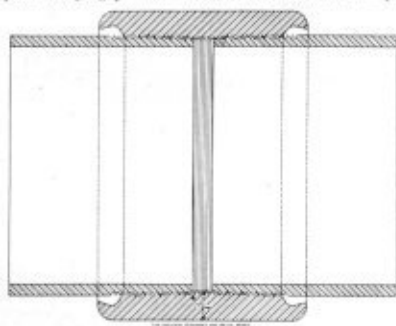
HEAVY WROUGHT IRON JOINT COUPLINGS.
